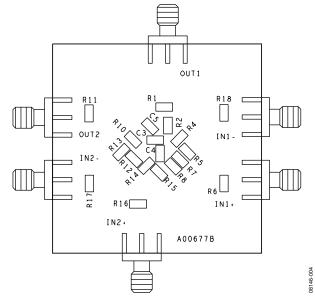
Evaluation Board Assembly Drawing, Circuit Side
